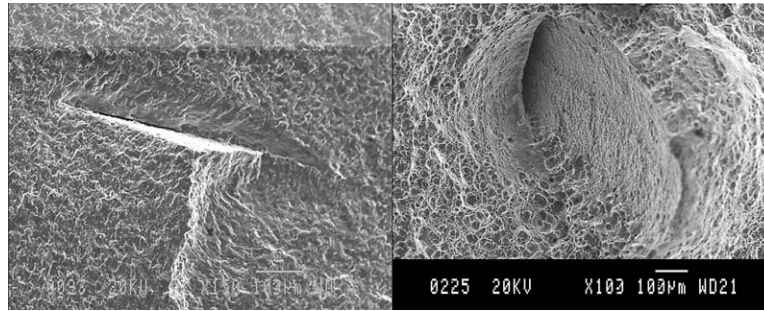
Fractographs of SP FSW fracture surfaces. (a) Left side: apparent defect on fatigue region; (b) right side: apparent defect/void in fast fracture region.
